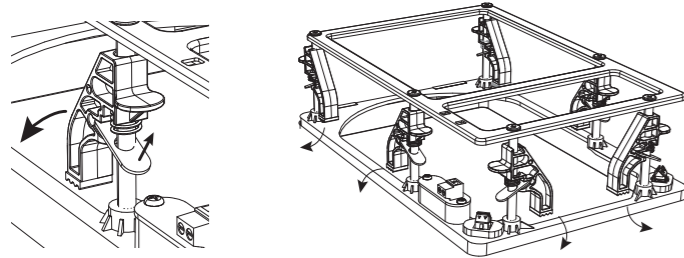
Adjusting the Mounting Clamps from the Stowed Position
